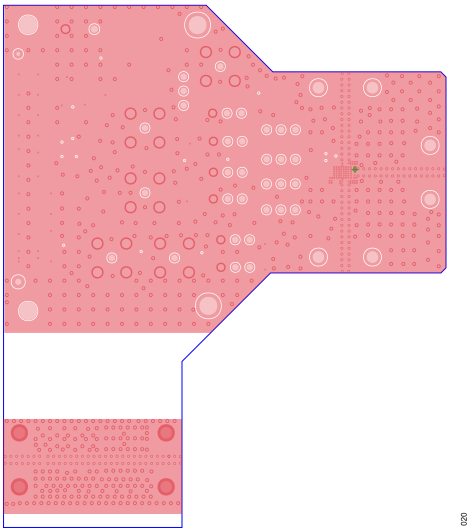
EVAL-ADGM1001SDZ Component Side Ground Plane PCB Drawing (Layer 2)
